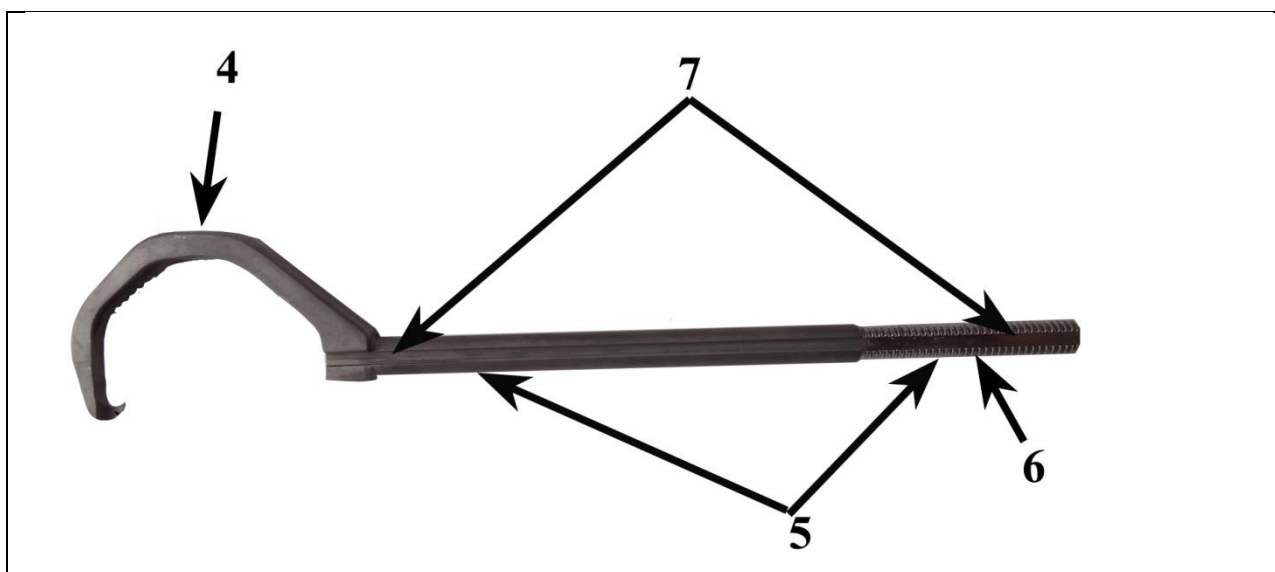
Hook-shaped part of SUV-CLAMP, where: 4 – hook-shaped curved pad; 5 – shank; 6 – threaded part of the shank; 7 - groove
